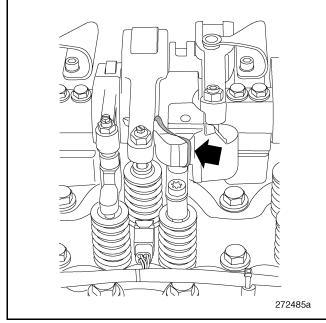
Securing Pistons in Exhaust Rocker Arms
